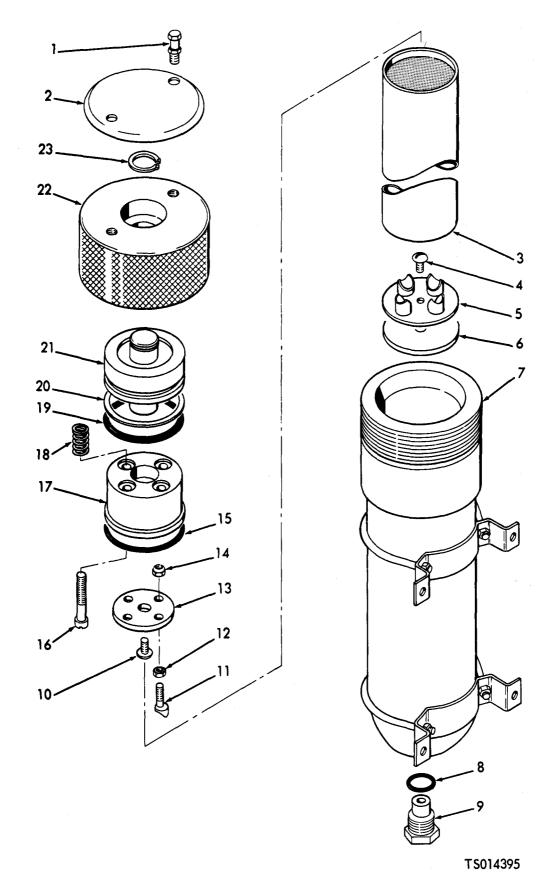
Dehydrator and separator, disassembly and reassembly.
